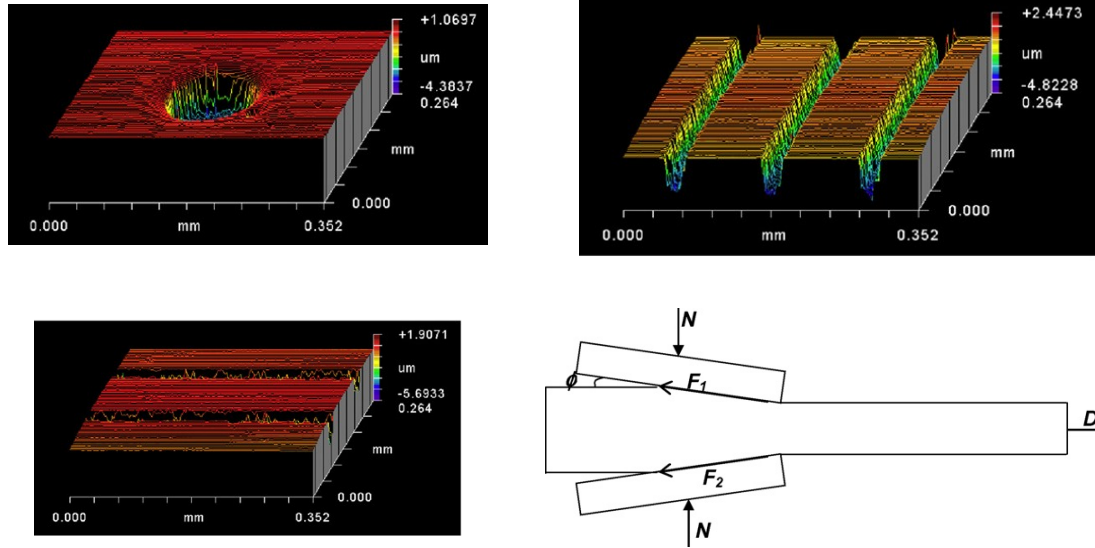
Textured Inserts of Wire Drawing Dies [3]
